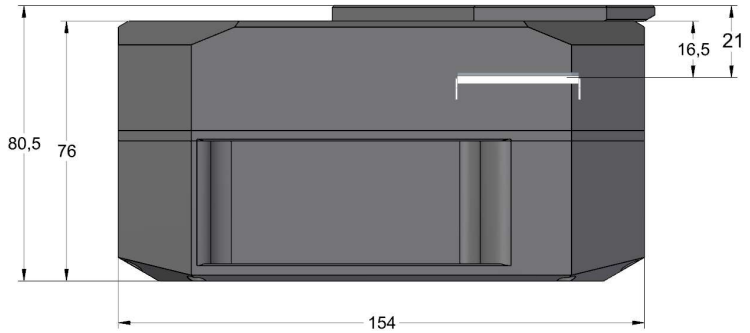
C4 camera head with Enhanced cooling side view dimensions
